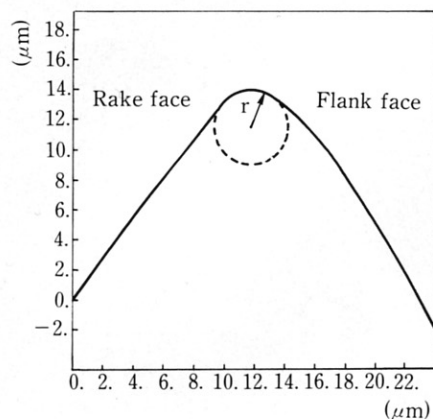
(b) Cross section of edge's radius after preparatory cutting
